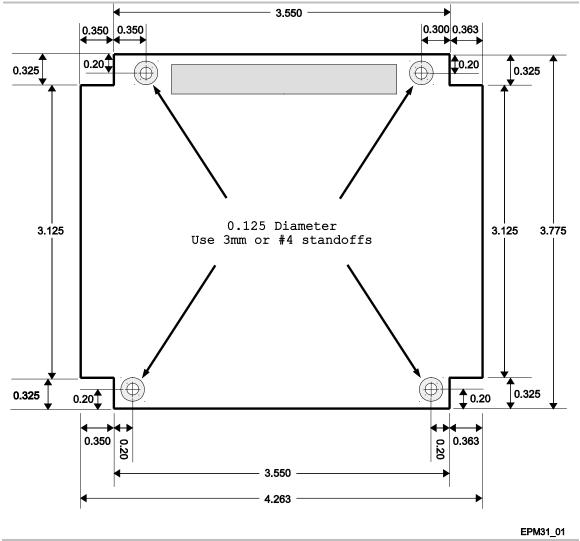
EPM-31 Dimensions and Mounting Holes (Not to scale. All dimensions in inches.)
